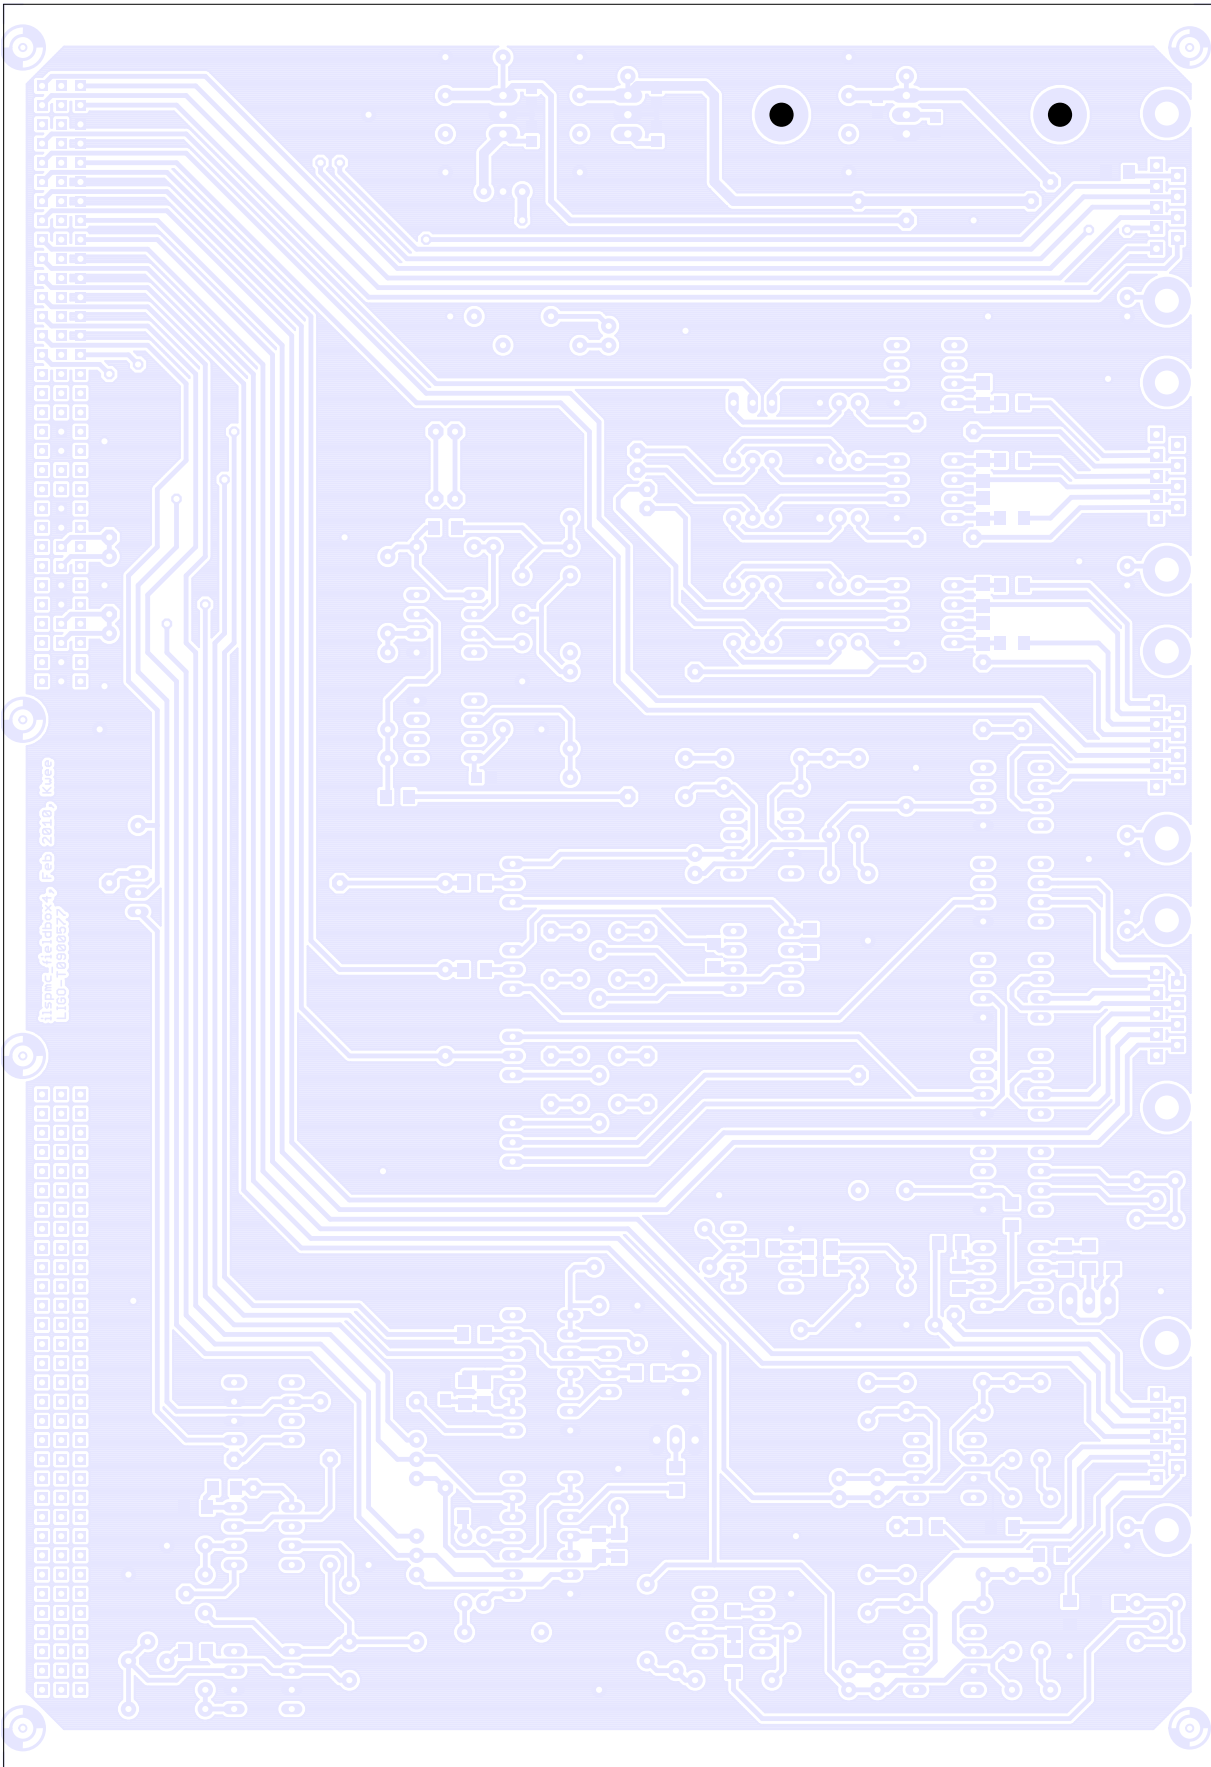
Board bottom view showing drills with 1.0 mm (0.039 in) diameter
